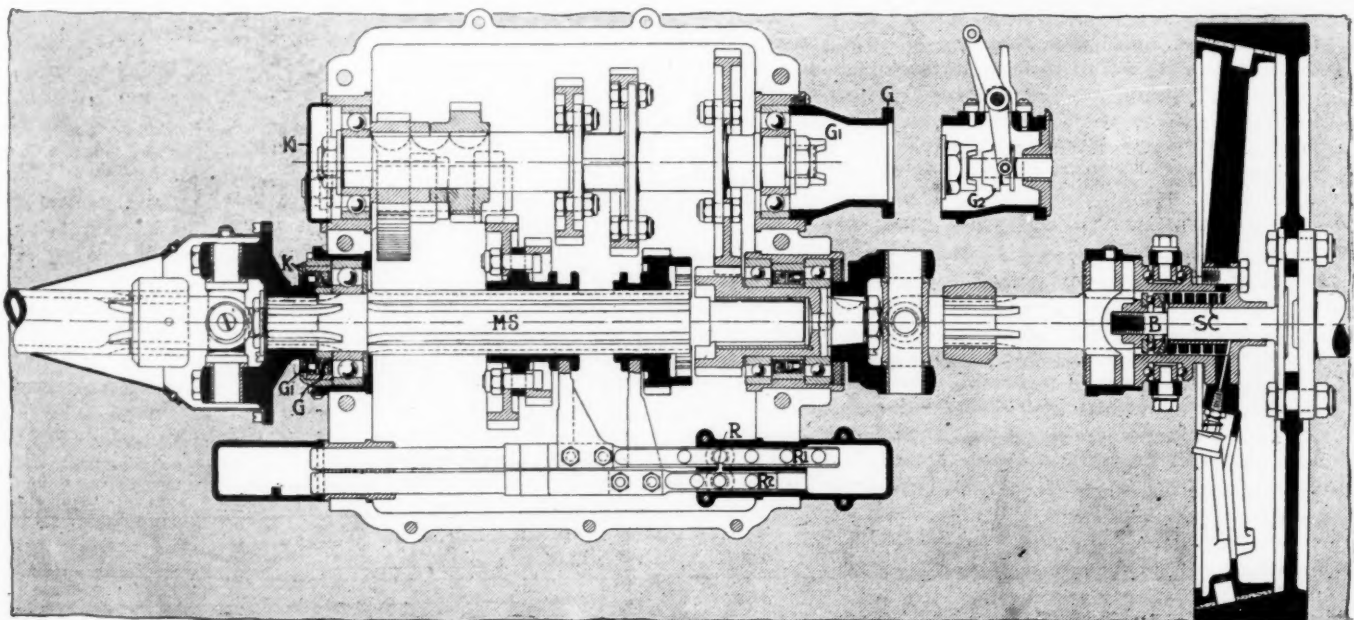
Sectional view of the four-speed gearset and cone clutch. Attention is called to the arrangement which prevents simultaneous meshing of different gear trains
